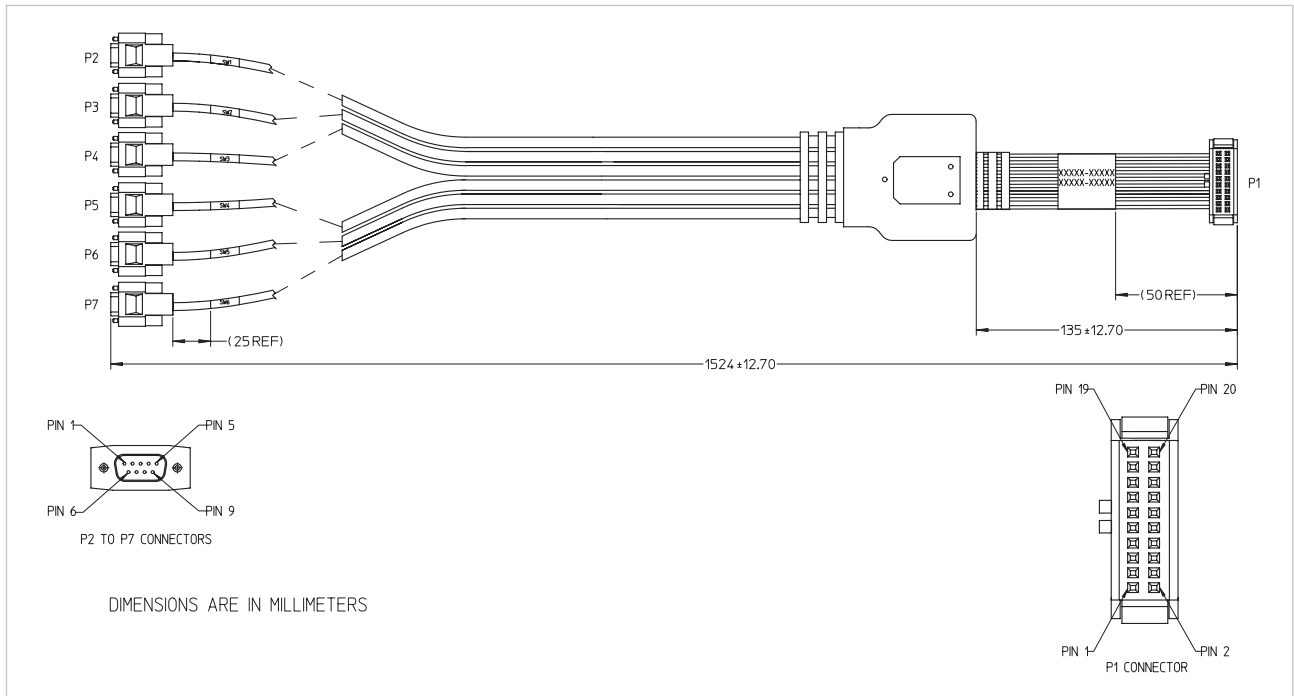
Option 501 - 20 pin to 6x9 pin-D-Sub interface cable assembly
